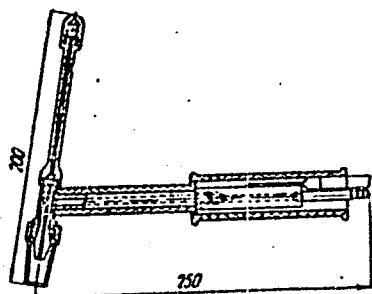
Overall view of burner for argon-arc welding (with currents of up to 200 a)
